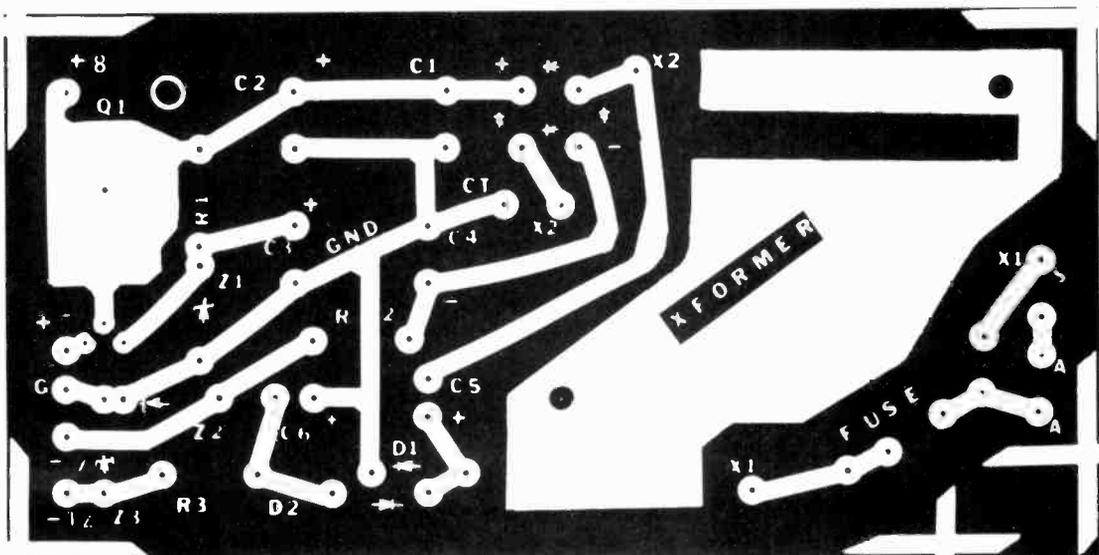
Actual-size etching and drilling guide for the power supply board.
